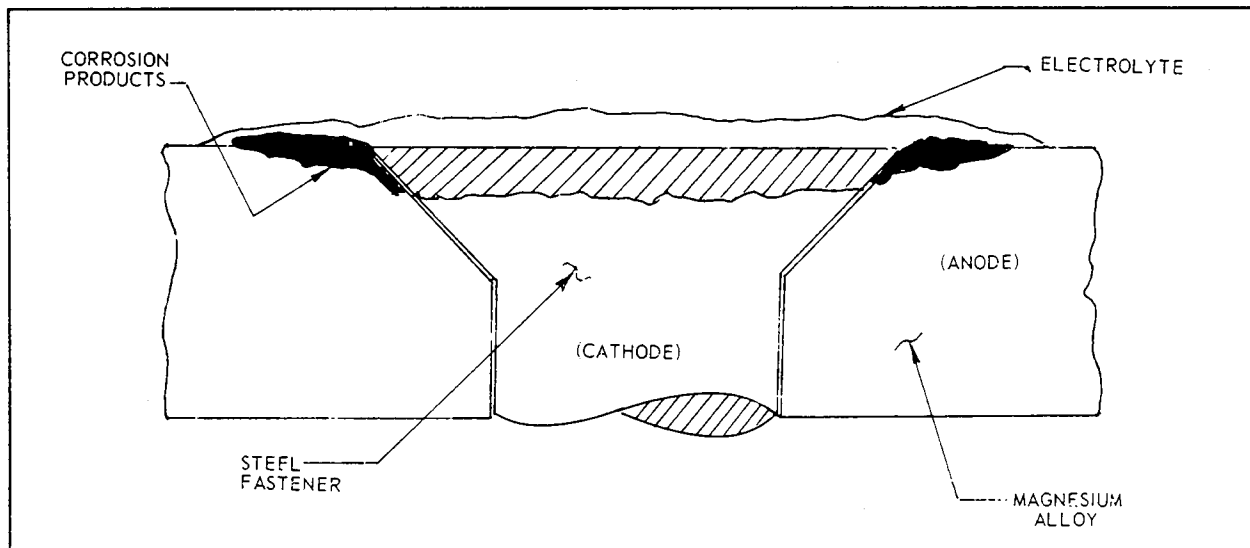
GALVANIC CORROSION OF MAGNESIUM ADJACENT TO STEEL FASTENER
